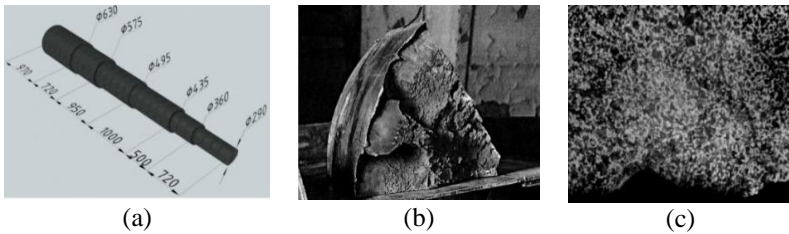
Analysis of the "Mouthpiece" part: (a) forging sketch, (b) metal fracture at the failure location, (c) microstructure at the failure location.
